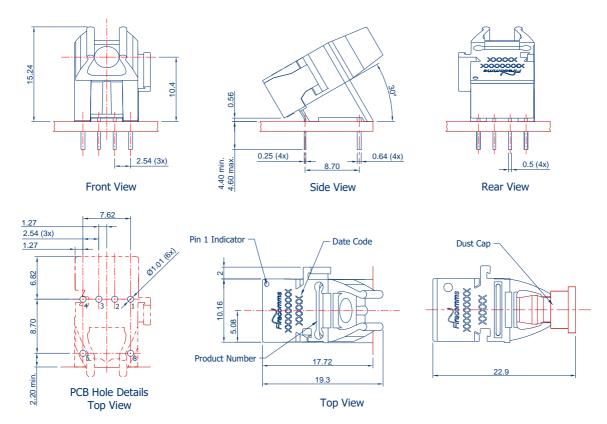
Mechanical dimensions of RedLink® tilted connectors and PCB footprint, which is a top view General dimensional tolerance is ± 0.2 mm
